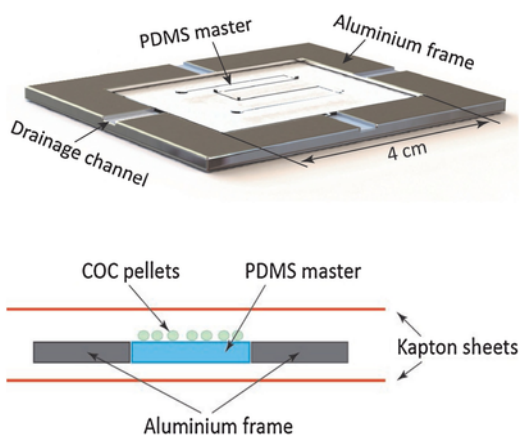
Schematic of casting assembly for molding patterned COC starting with COC pellets. Fabrication of PDMS master is done prior to this step as shown in Fig. 2.
